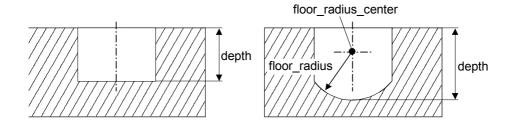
Planar (left) and radiused (right) pocket bottom condition
